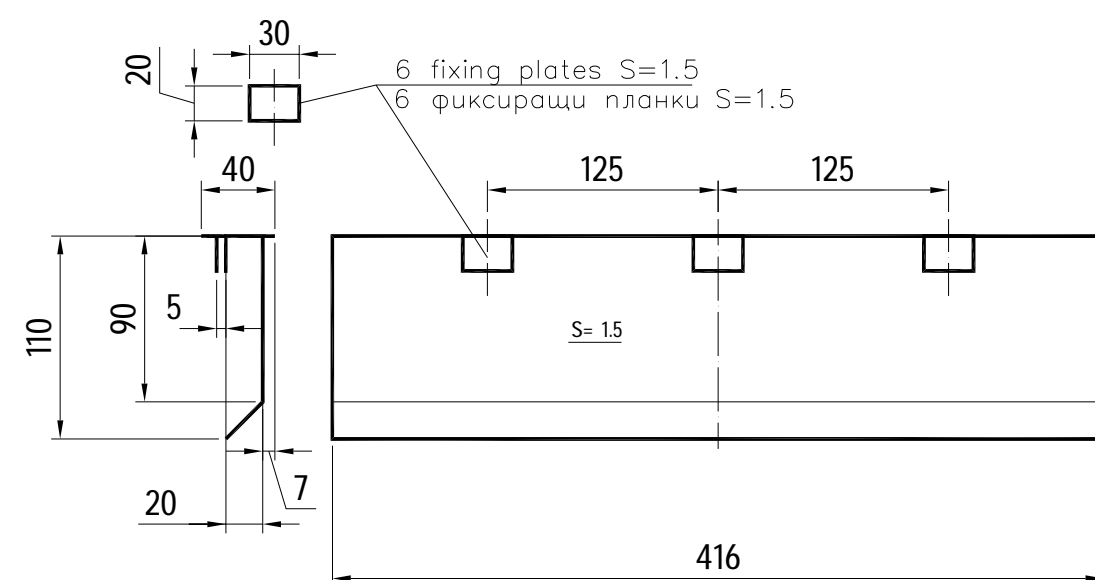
PLATE 1.5 mm St 3
